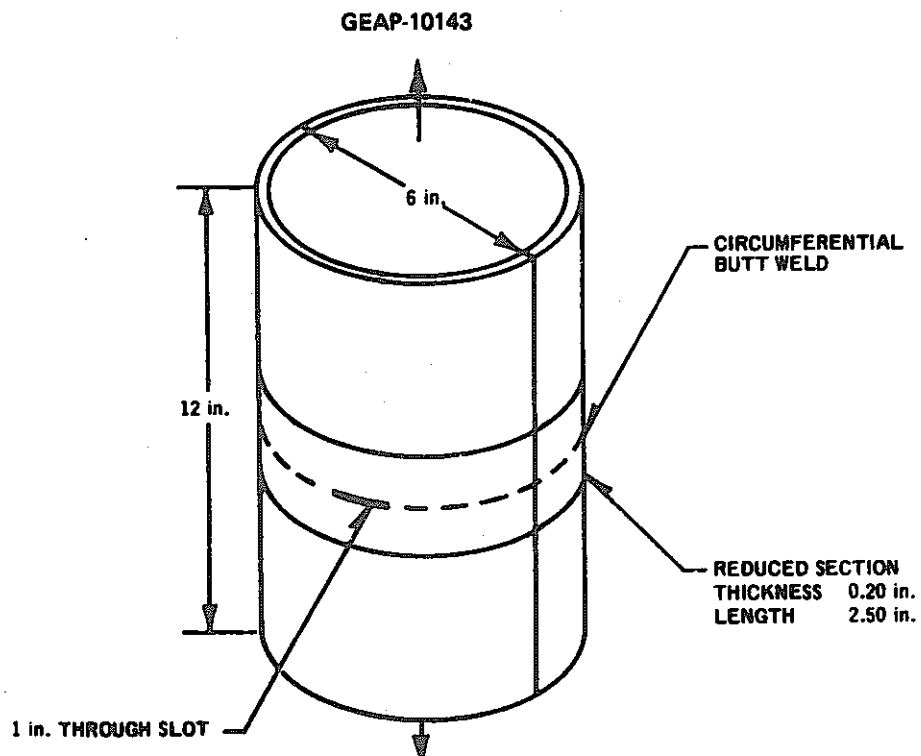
Sketch Showing Two Halves of Butt-Welded Pipe Specimen Arranged for Cyclic Tensile Loading
